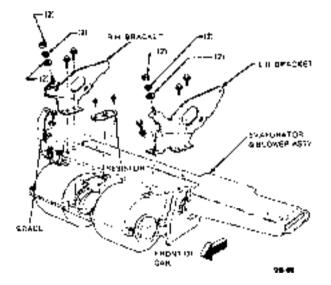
Evaporator and Blower Assembly Brackets and Attachments
